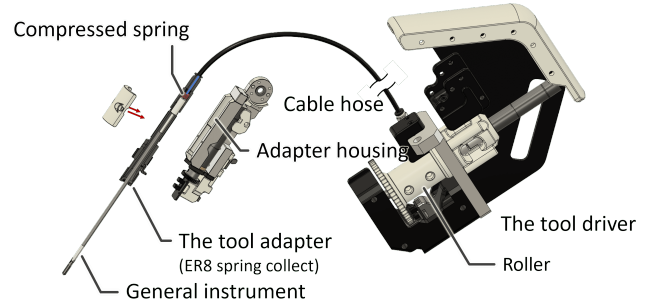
Instrument adapting mechanism: the tool adapter, the adapter housing on Link 5, and the tool driver. Such a design adapts general surgical instruments and drives them through the cable-driven mechanism with a miniature end-effector, a design that allows the two instruments to get very close. Adaptable instruments include the electro-surgical unit (ESU), clip applicator, and forceps.
